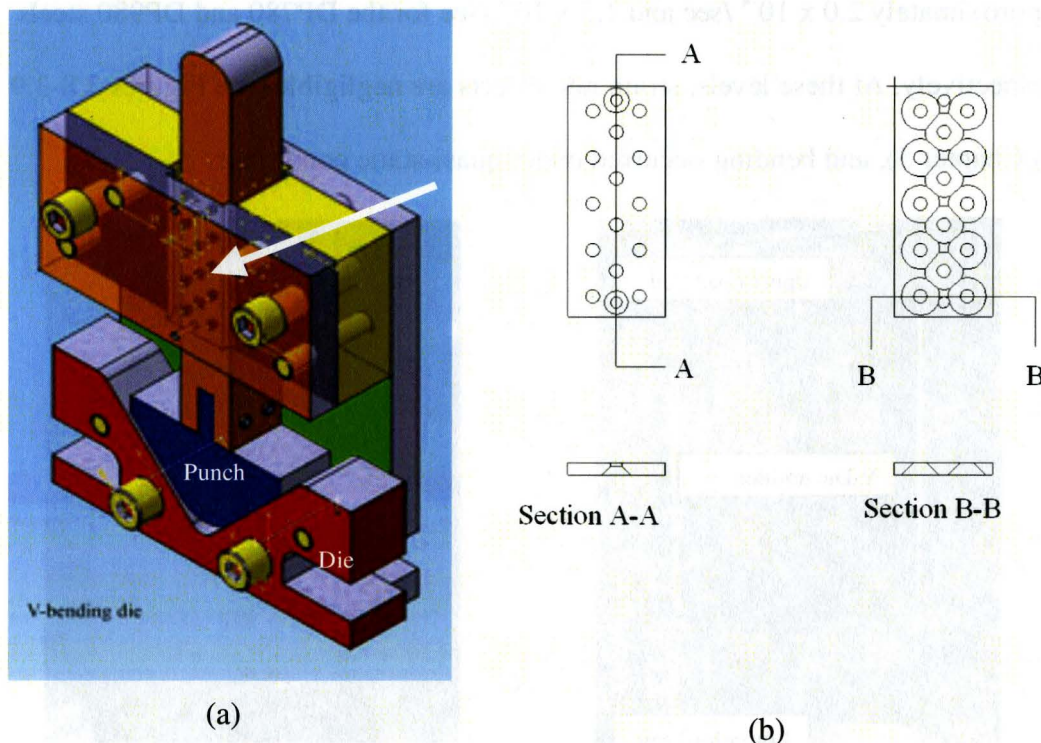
CAD model of V-Die assembly (a) showing punch slide mechanism that uses ball bearings to limit friction (b).
